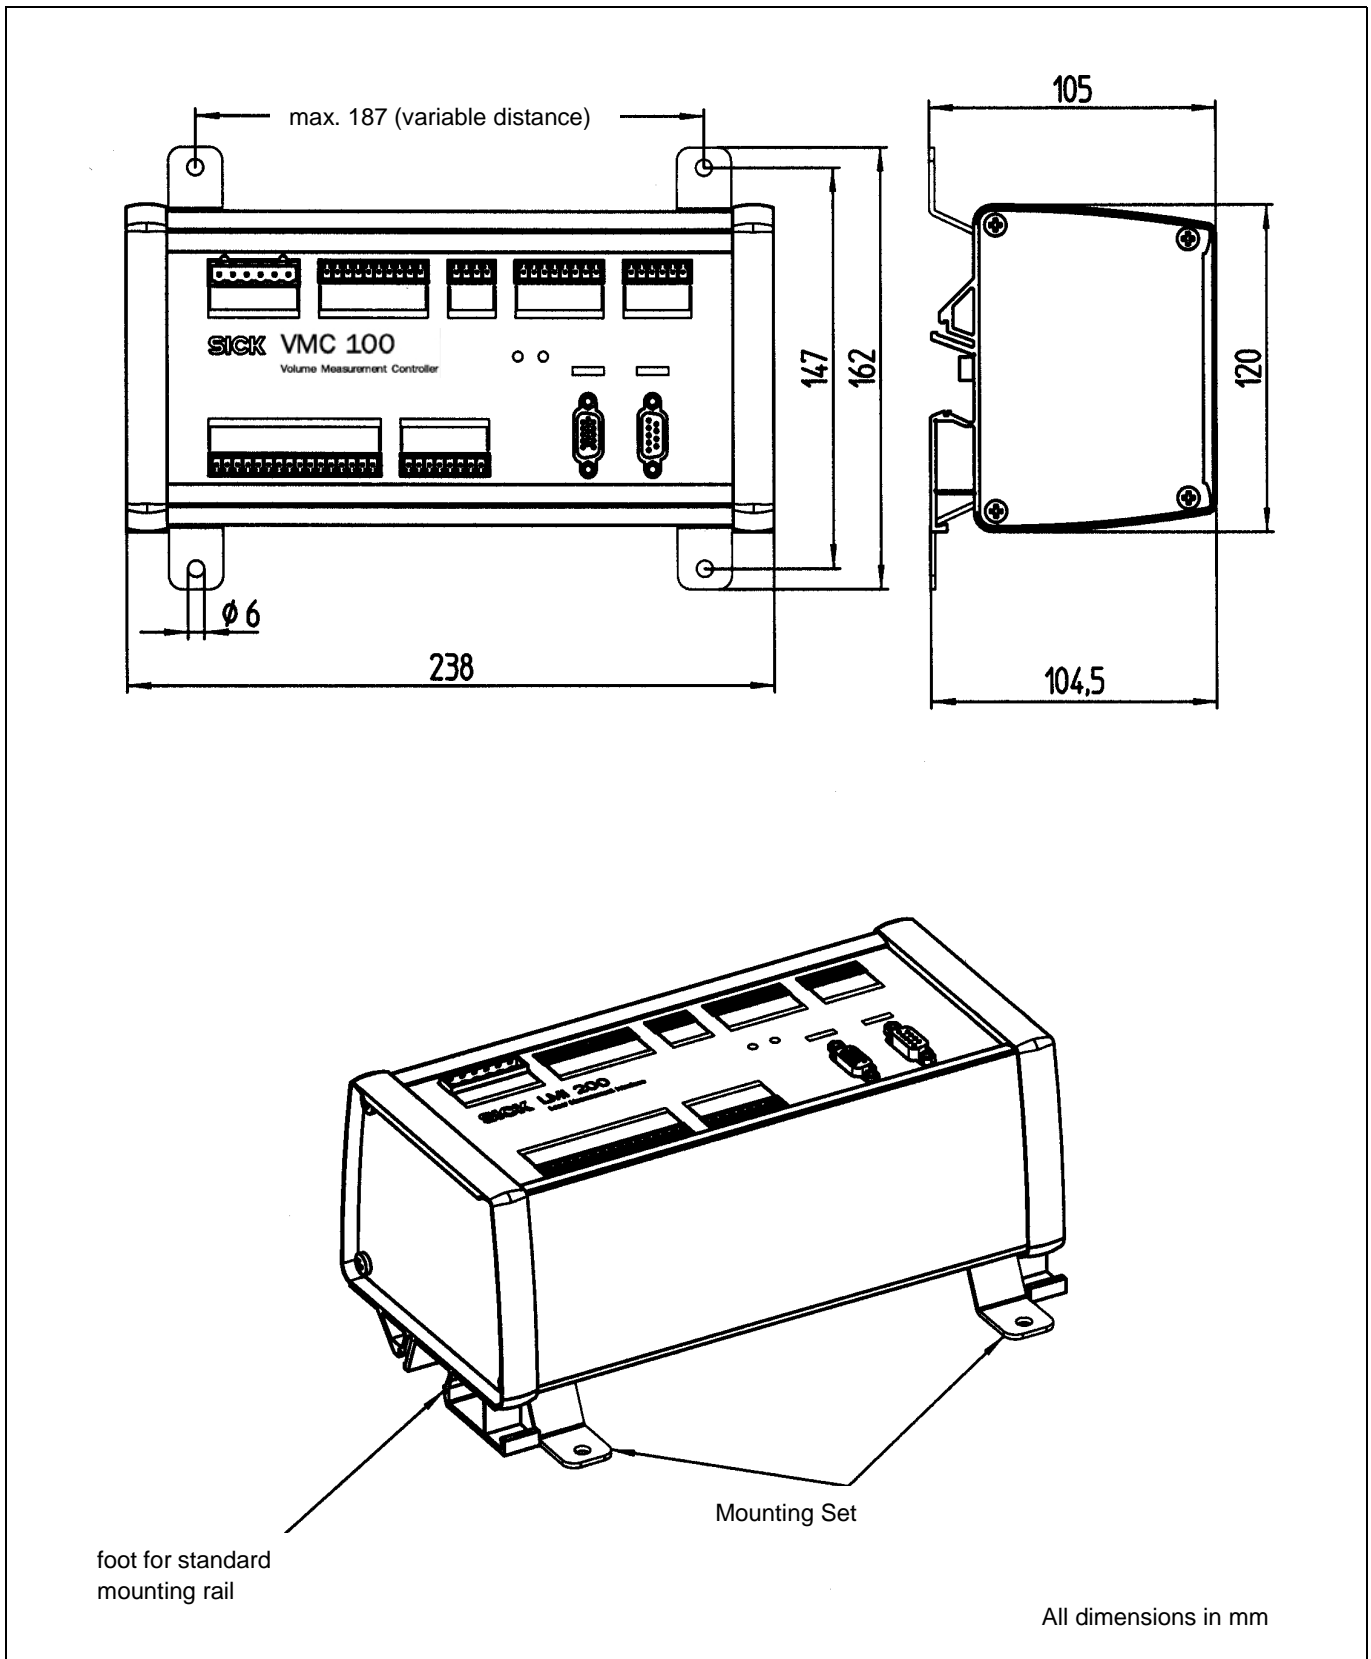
Dimensions of the VMC 100-0000 evaluation unit
